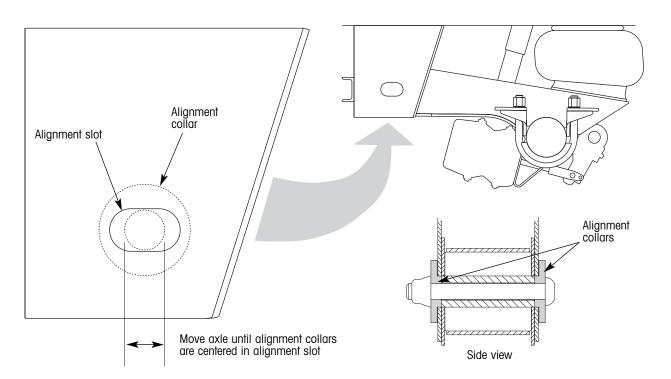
Axle positioning on the welded-collar type frame bracket when major adjustment (both axle ends) is necessary
